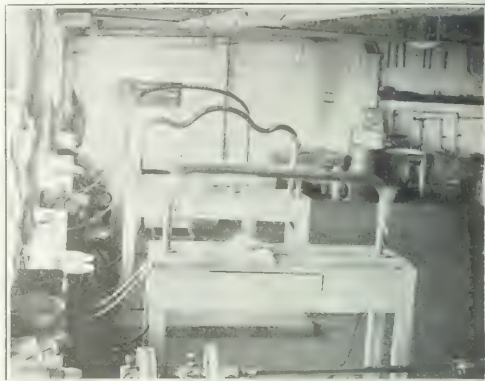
Brass Bed Head and Foot Pieces Electrically Heated for Lacquering.
